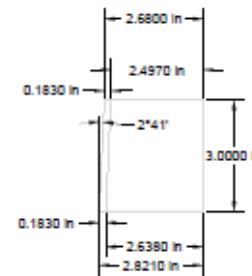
Shop drawings for cracking frame parts 2:9
